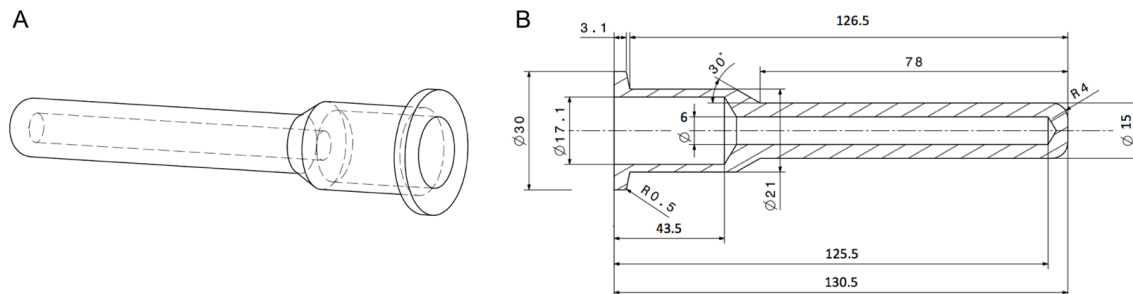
(A) Schematic drawing and (B) Drawing to scale of glass cold-finger of 10 ml volumetric capacity. Dimensions given in mm.
